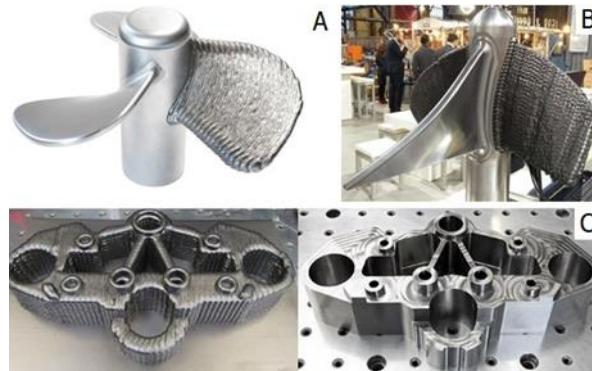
Examples of parts produced by WAAM technology (Huntingdon Fusion Techniques (A); Material district (B); Avianik (C))
